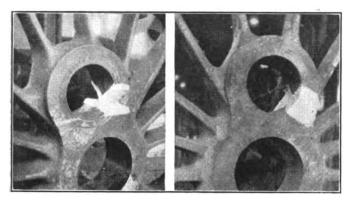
Driving Wheel Center Before and After Welding
